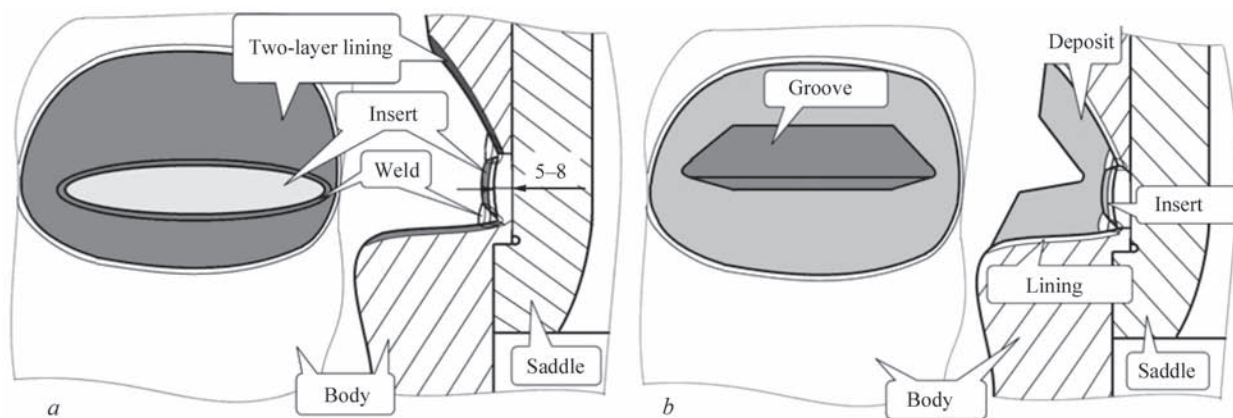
Preparation of a crack in the body of the MCP control valve for welding and the stages of its rewelding
